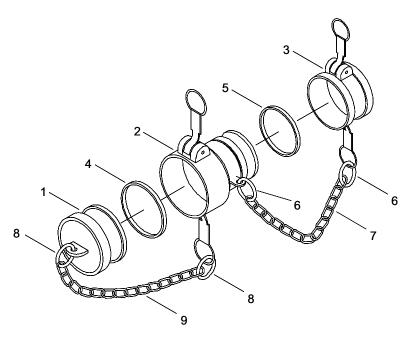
4 In. Female X 2 In. Male Reducer Assembly.
